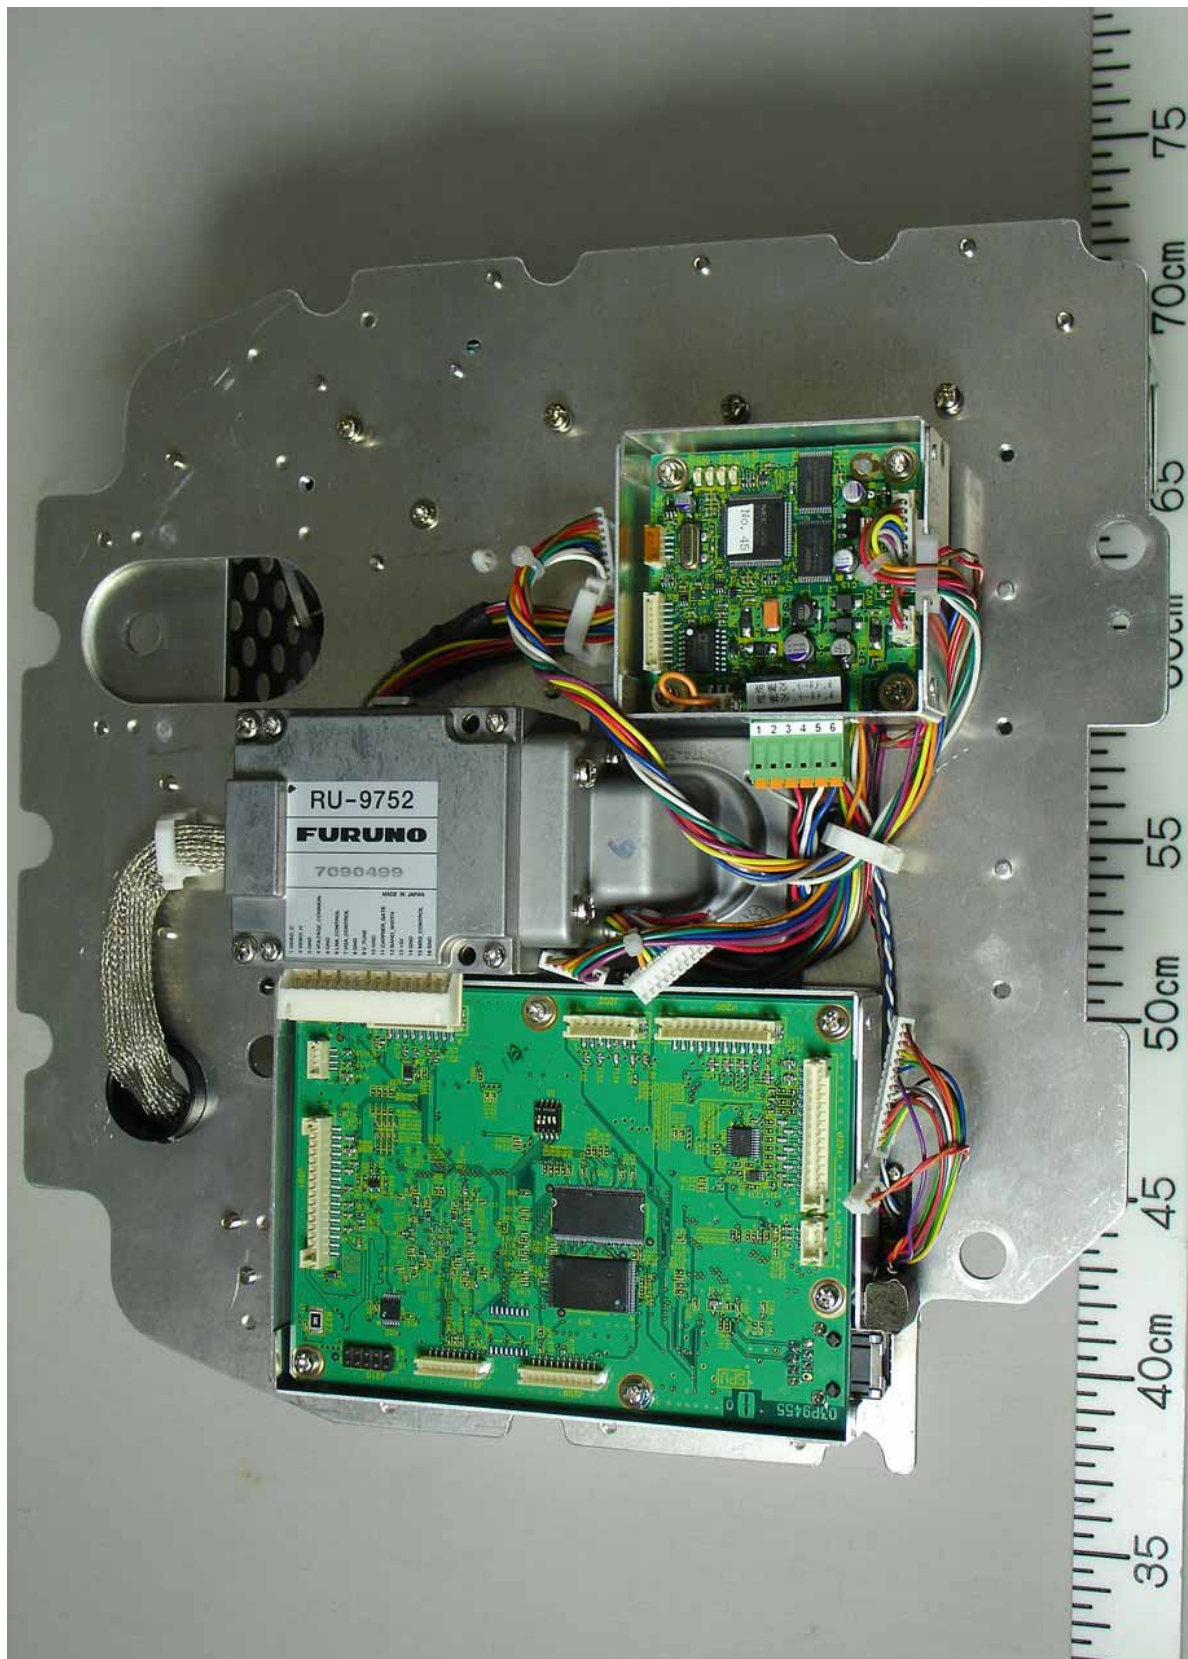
Transceiver module Bottom View (with Shield-covers removed, showing NMEA2000 Board 03P9462 (right), RXM module RU-9752 (center) and SPU Board 03P9455 (left))
